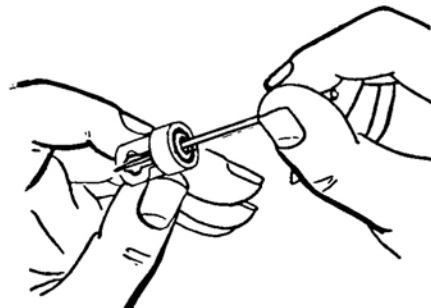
Use a pointed hardwood stick to clean spray hole as shown.
